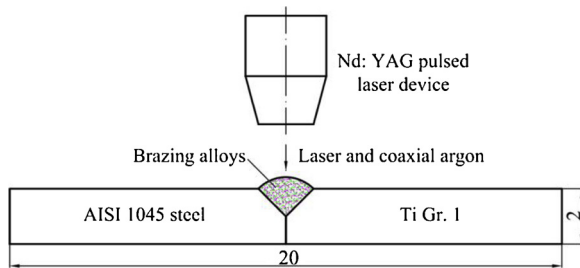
Schematic diagram of laser welding-brazing.
